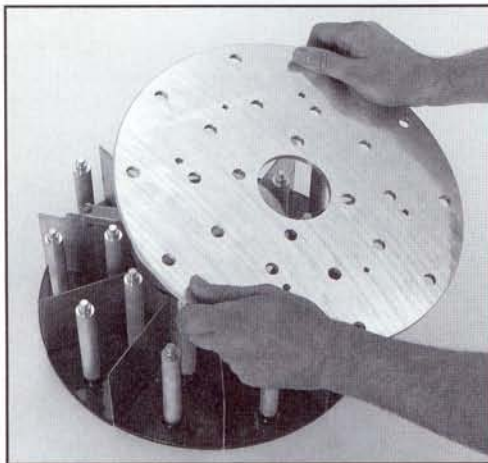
Plugs with Stems are shown when Knife Blade Assembly (Fig. 8) is removed. Notice 2 different circles of Plugs .
